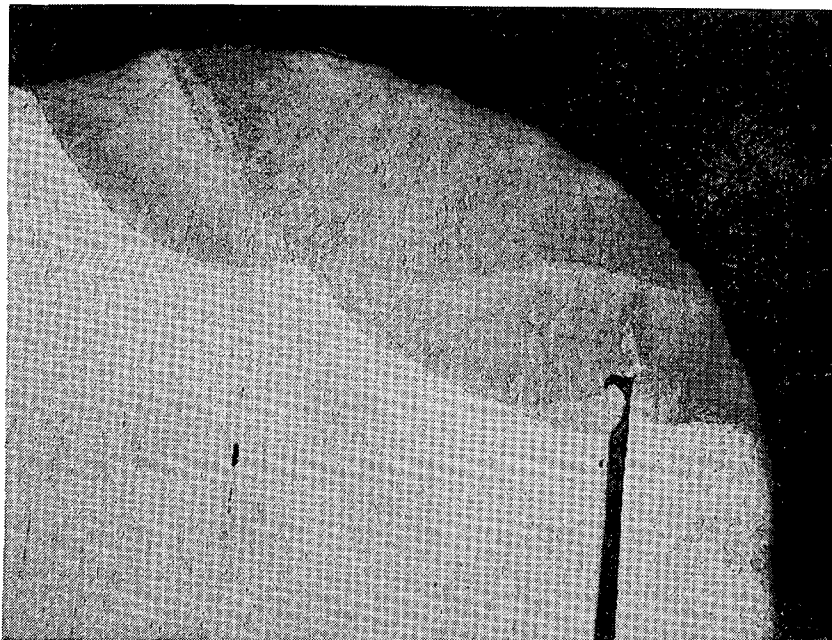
Source M-9; stainless steel outer container; top weld (24.8X).
